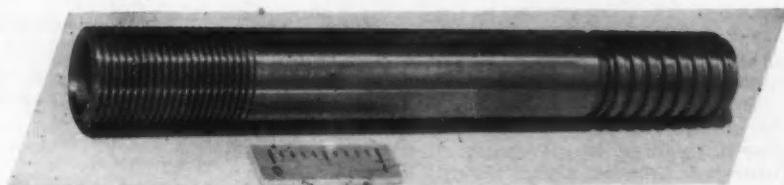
American Standard and Acme threads machined in molybdenum tubing.
